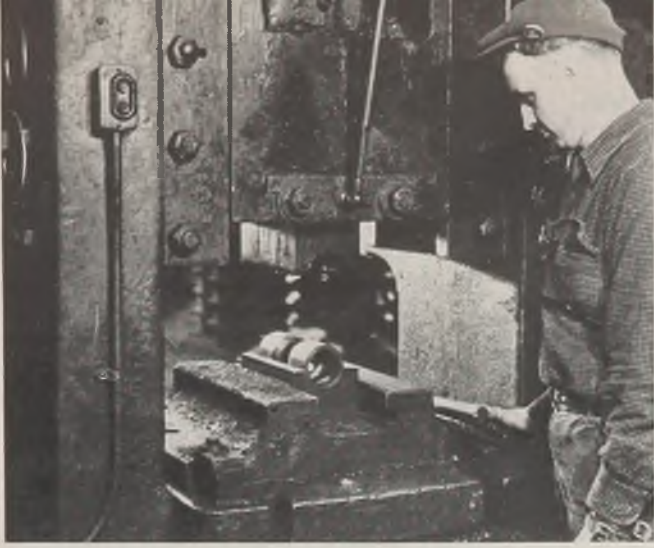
Left: Outside diameter of spooled hub is sized cold in this 500-ton press
